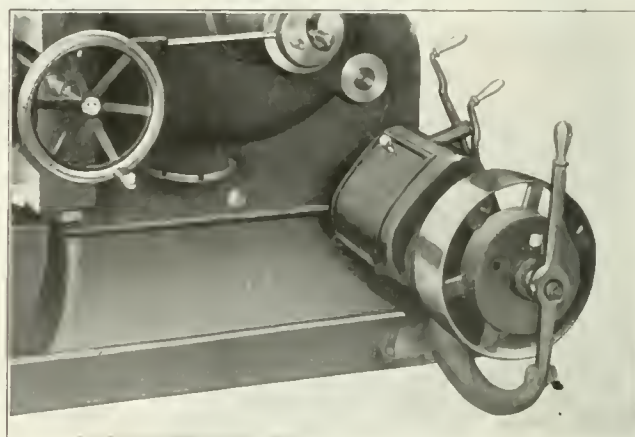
Back-geared Crank-shaper with Speed-box and Clutch Pulley
